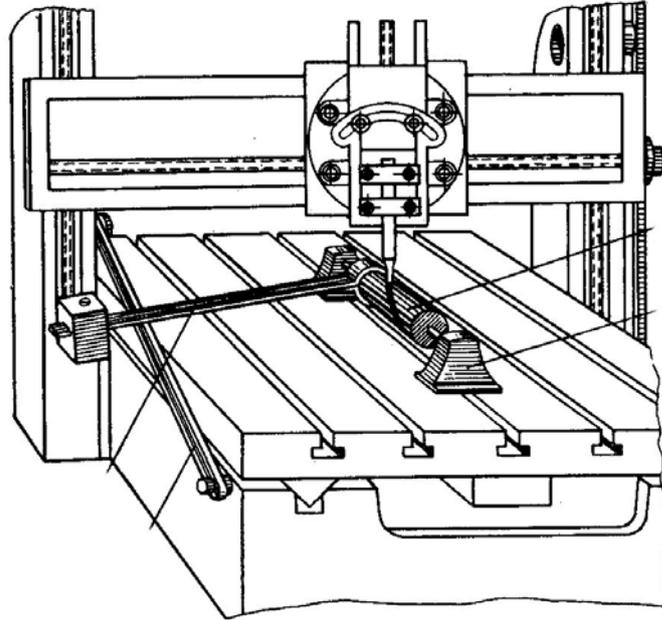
Attachment in planing machine for cutting long lead helical grooves.
